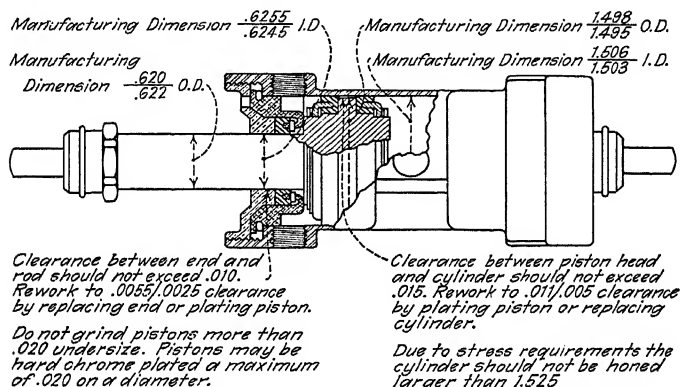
Maintenance drawing of cowl-flap operating cylinder.
